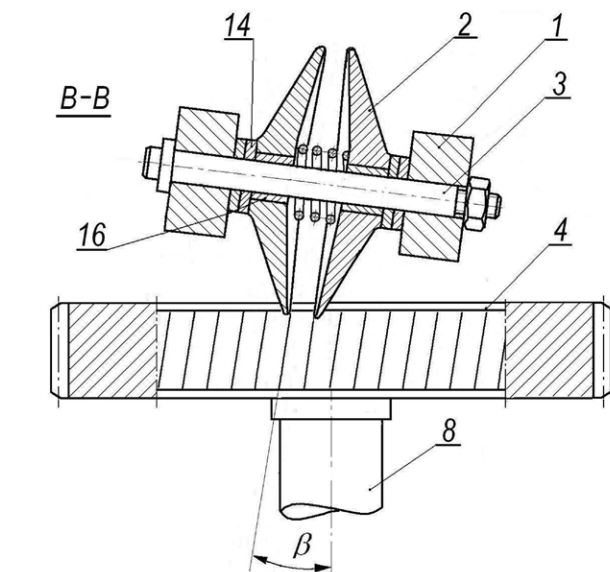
Adaptation of the device from Fig. 1 for burnishing of helical gears
